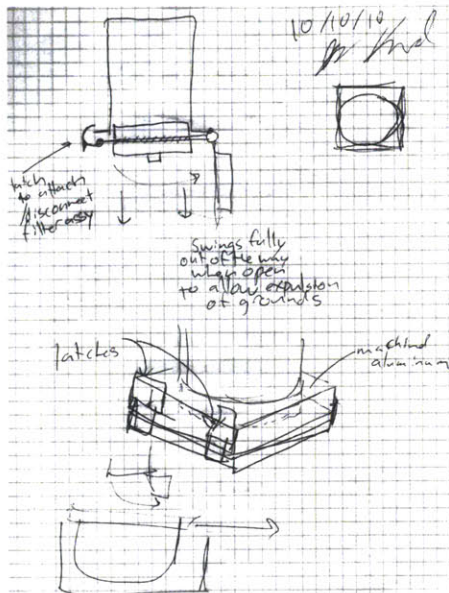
Four Part Welded Upper Hinge
